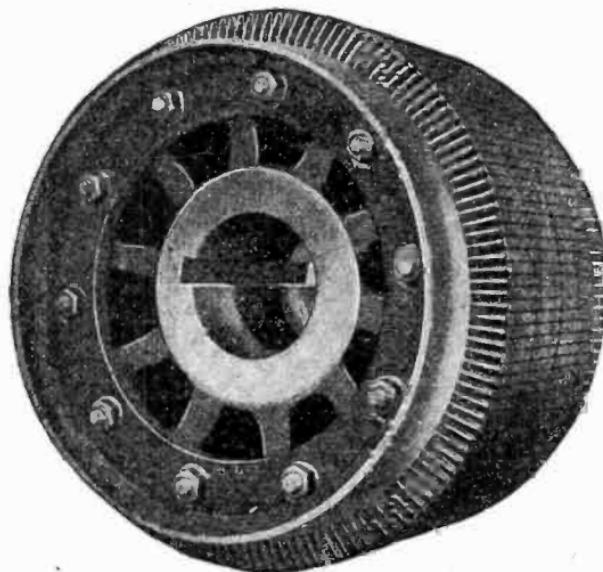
,800.—*General Electric slip ring motor construction 4.* Armature ready for winding showing heavy end flanges secured by through bolts and end fingers.
